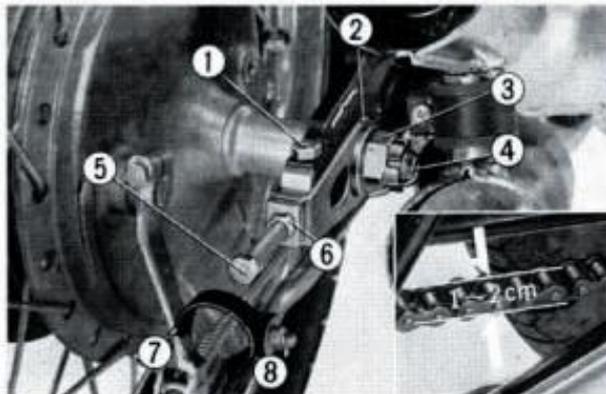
① Fork cap bolt ⑤ Adjust bolt
